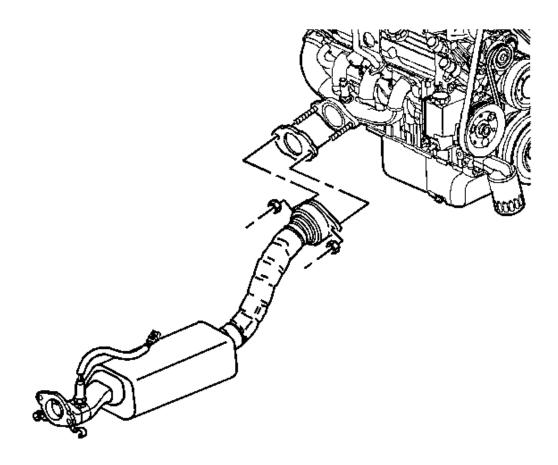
View Of Catalytic Converter & Exhaust Manifold Pipe Stud Nuts Courtesy of GENERAL MOTORS CORP.
